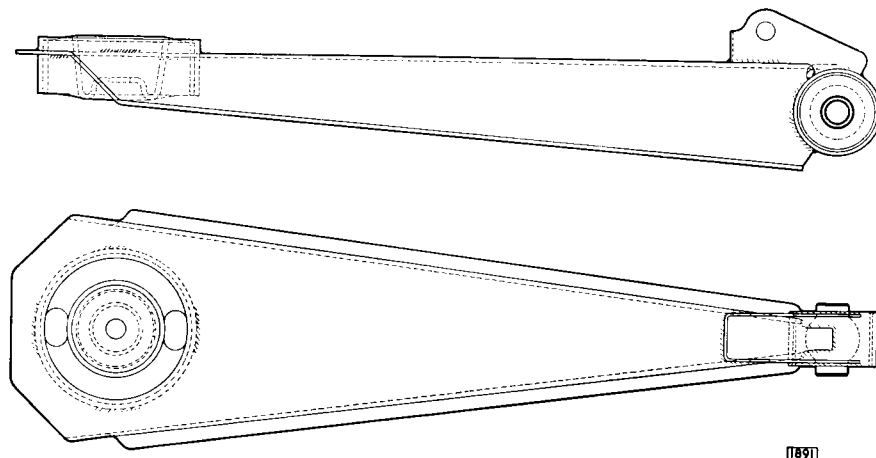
Showing the position of the mounting rubbers in the radius arm
